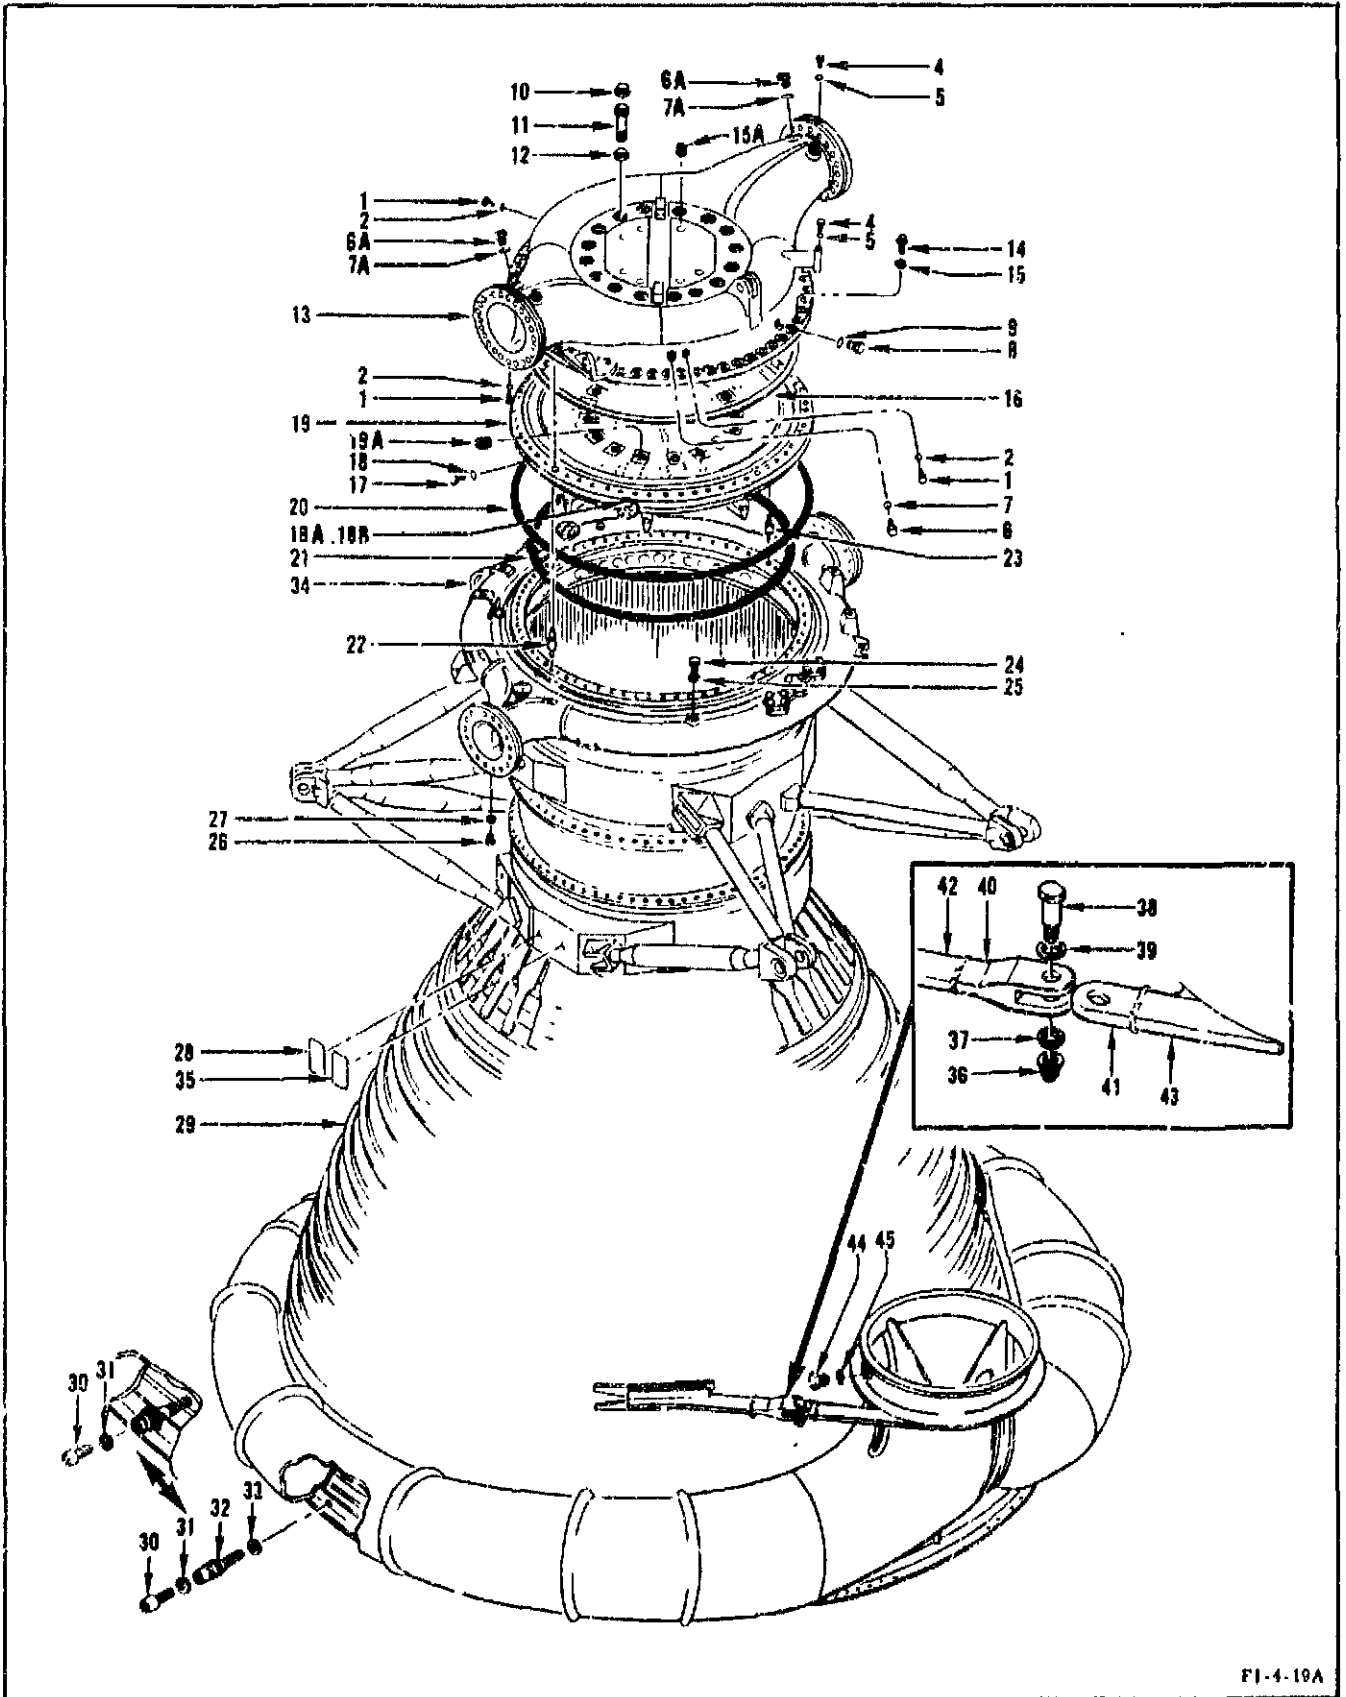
Thrust Chamber Assembly--Exploded View (Sheet 1 of 2)
